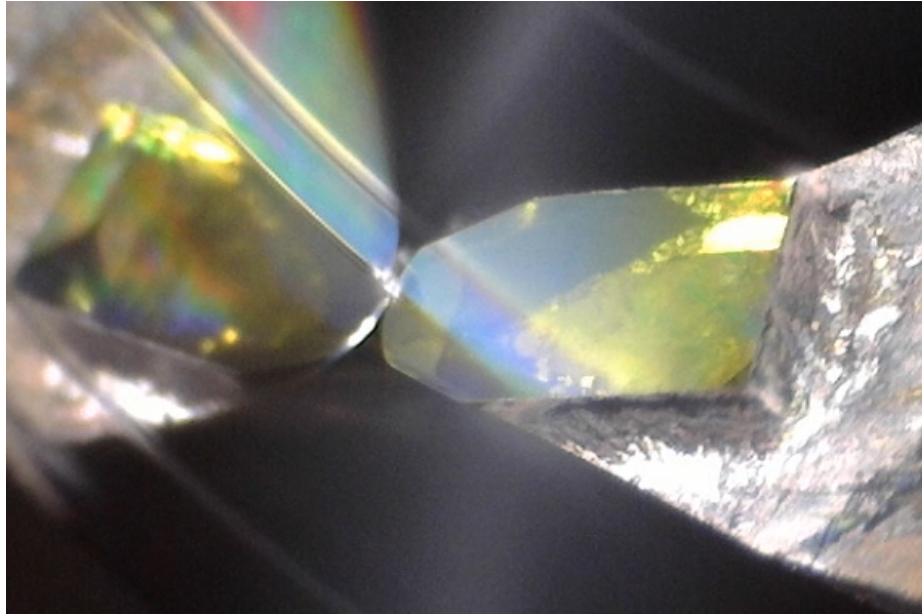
Single crystal diamond tool facing a Monel workpiece.
